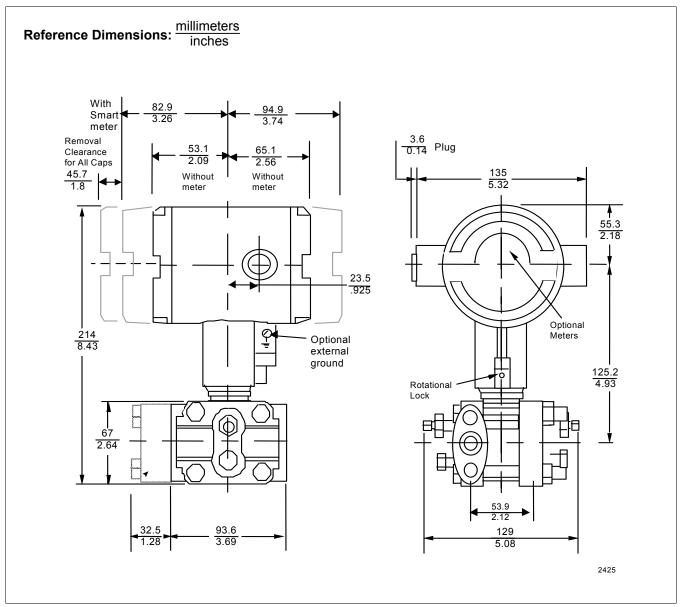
Typical mounting dimensions for dual-head models STG944 and STG974 for reference
